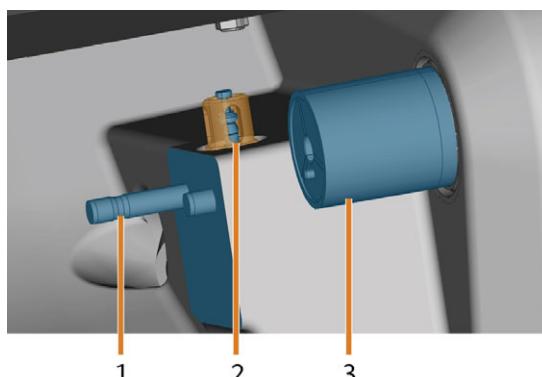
TOOL MAGAZINE HOLDER, MEASURING KEY, BLOCK HOLDER (IN BLUE)
